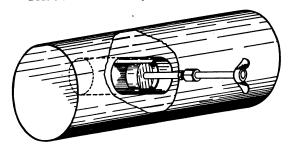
Detail of valve on distributor shown in Fig. 19.
